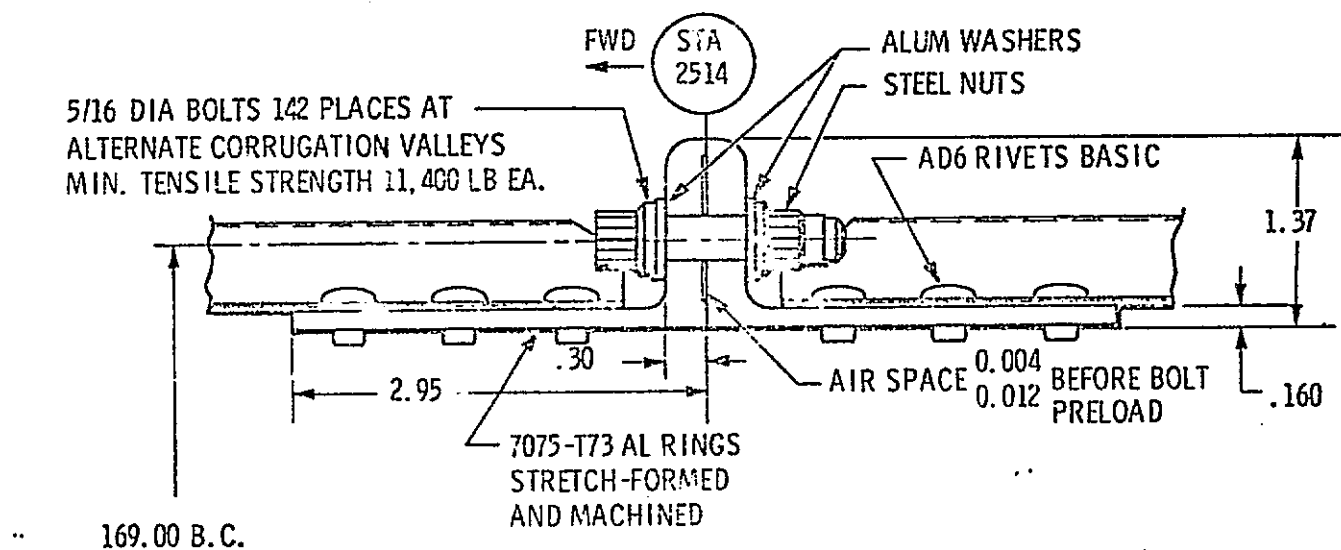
CYLINDRICAL SECTION FIELD JOINT DETAILS.
